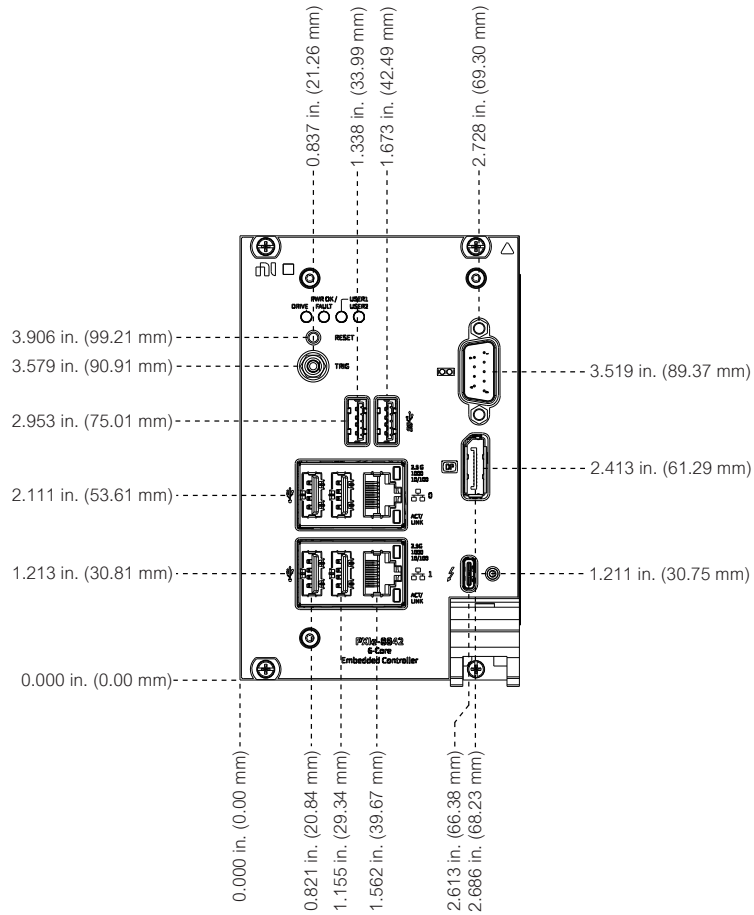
PXle-8862 Front Panel Layout and Dimensions
